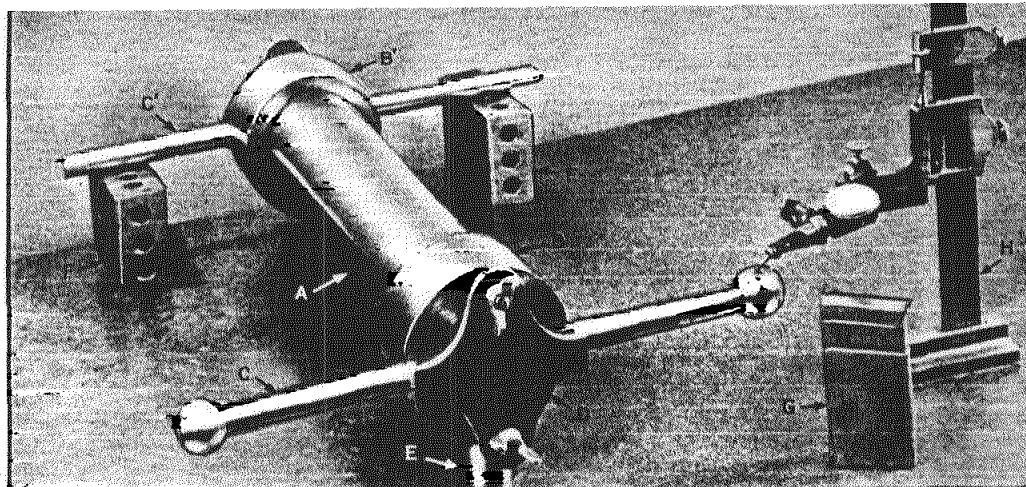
Setup for measuring angular changes in section of pre-set torsion spring after removal of successive surface layers.
